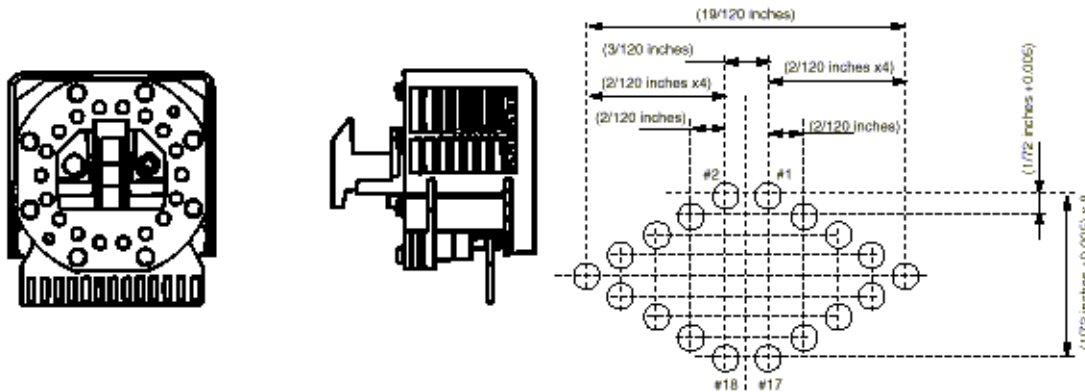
Arrangement of the head pins - View from the tip of the printhead
